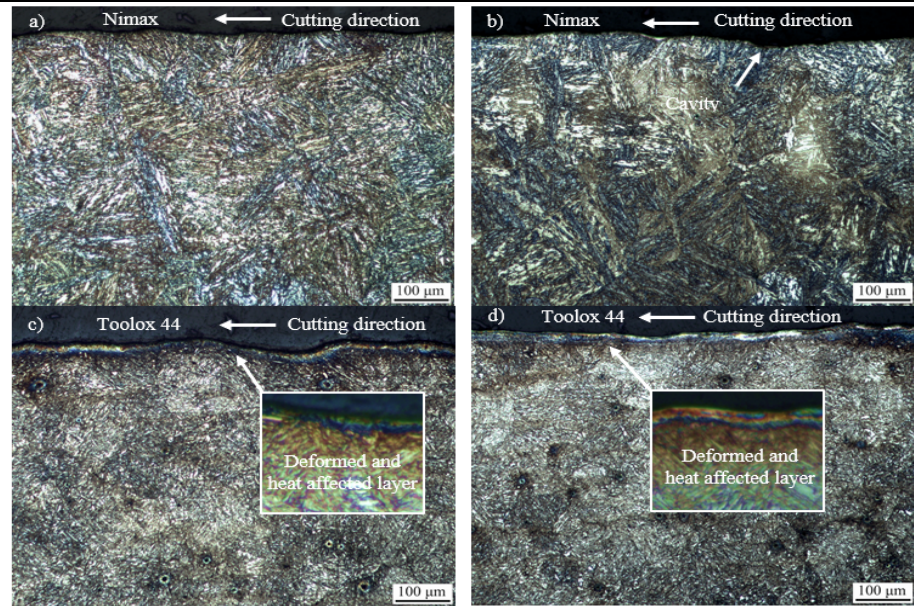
Figure A. Machined surface and sub-surface images of Toolox 44 ve Nimax mould steels
